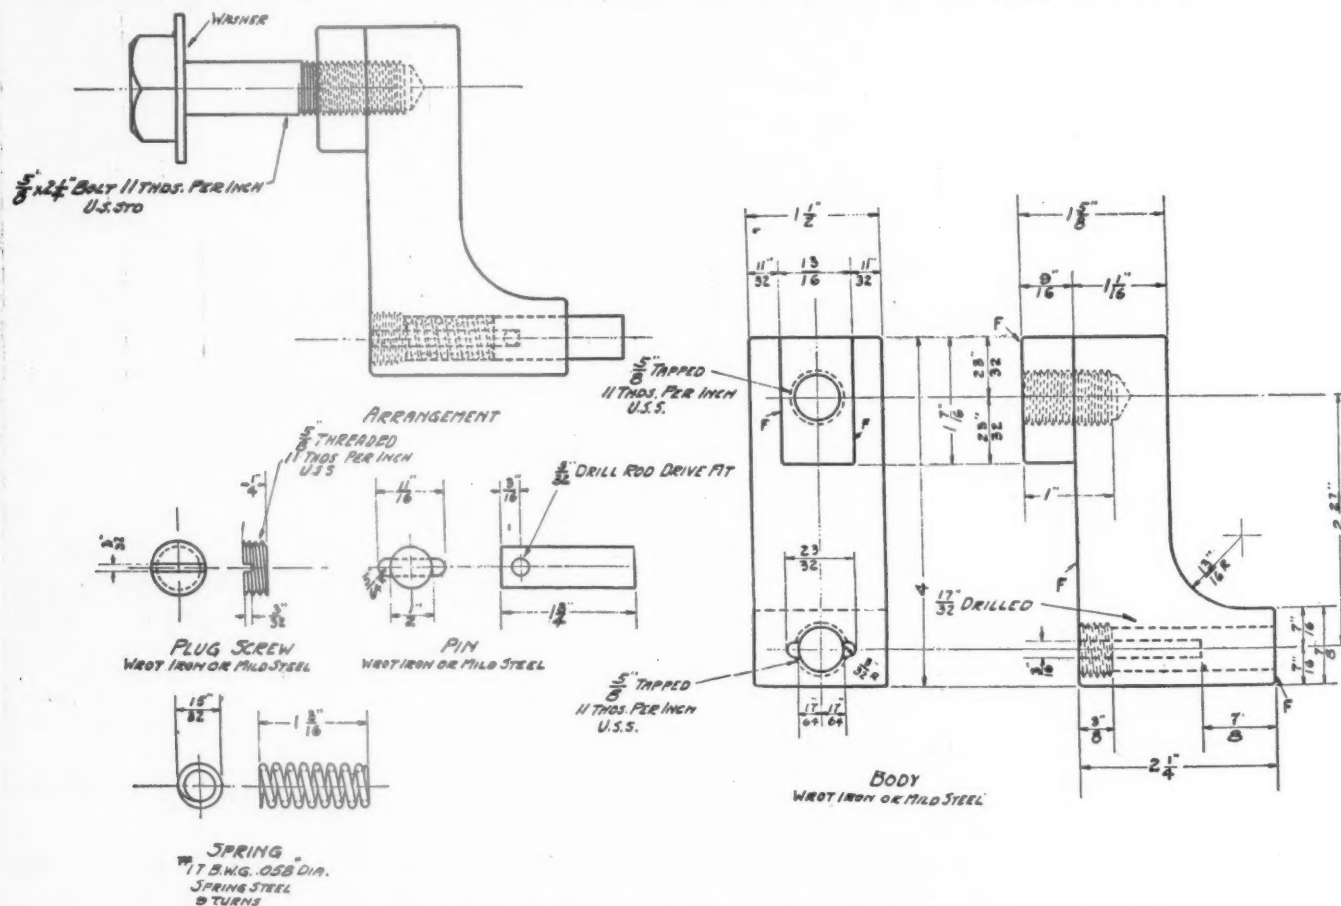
Lathe Dog or Driver for Crosshead Pins
